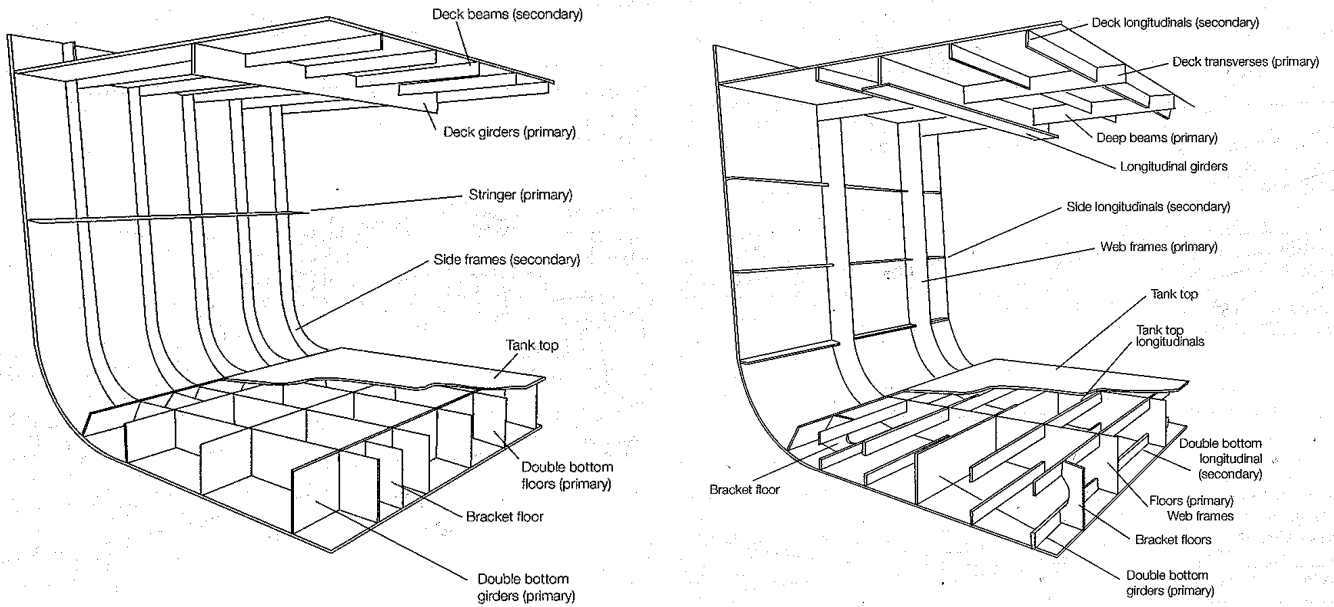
Transverse (Left) and Longitudinal (Right) Framing
